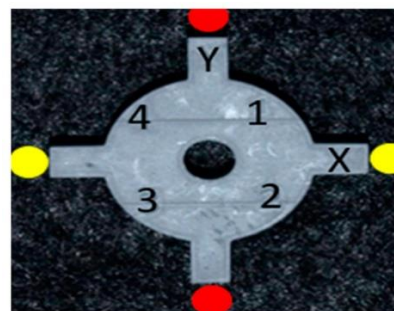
Illustration showing the positioning of the digital caliper jaws for measurement. Red dots indicate the placement for Y-axis measurements, while yellow dots indicate the placement for X-axis measurements.
